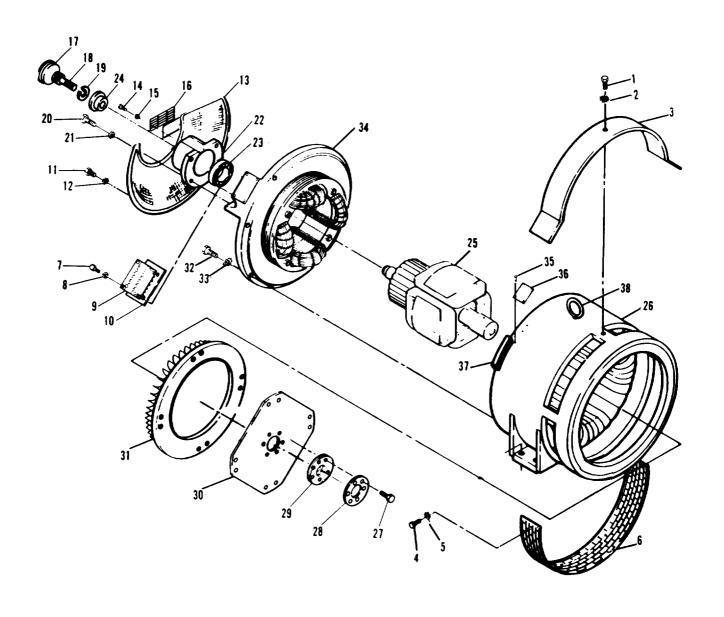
Generator Assembly, Exploded View (Sheet 1 of 2)
